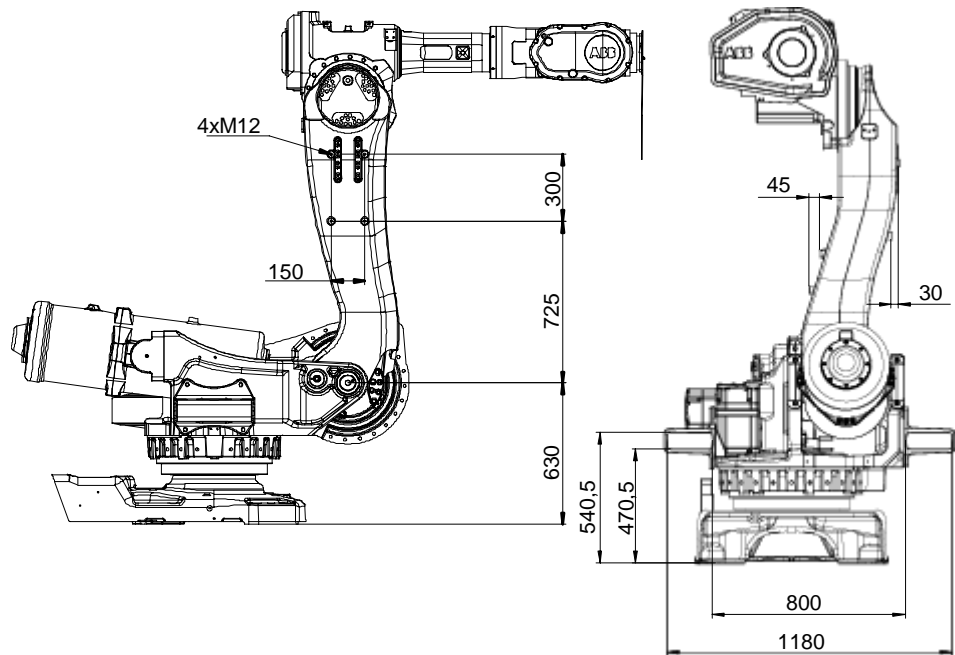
Holes for mounting extra load on upper arm on IRB 6650S (dimensions in mm).
